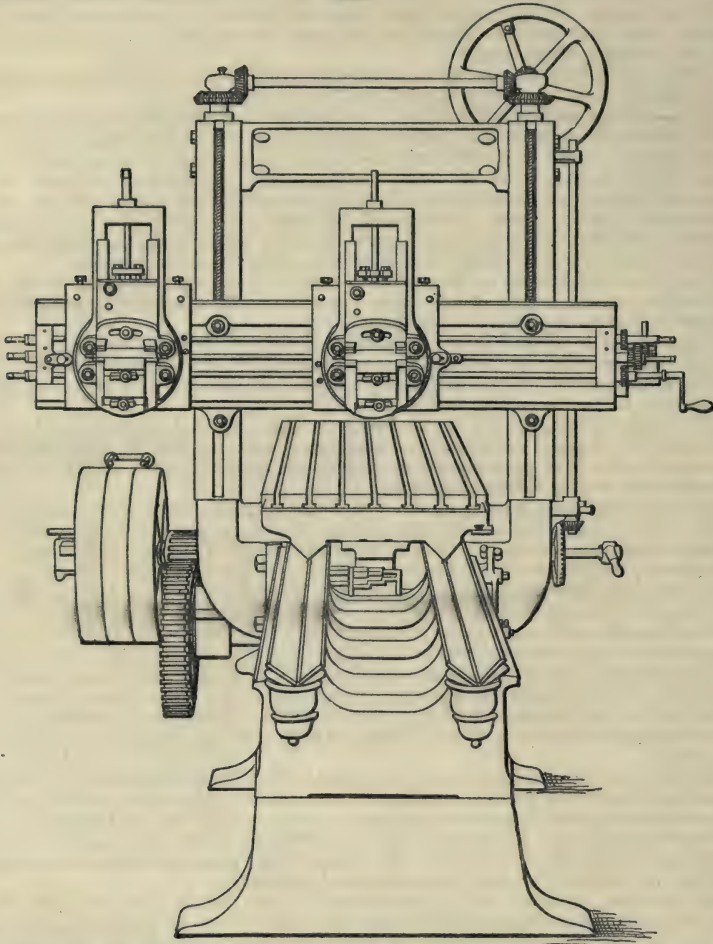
, 5233, and 5236 are of a planing machine, designed by Wm. Sellers, of Philadelphia, and made in England by Sharp, Stewart, and Co. Sellers has, in this machine, greatly simplified the construction of metal planing machines; he has provided a more thorough system of bracing for the bed between the uprights; imparted a smooth and uniform motion to the table upon which is placed the metal to be planed; placed the pulley-shaft so that its axis may be parallel with the line of motion of the table, thus enabling these machines to be placed parallel to lathes, and permitting a better arrangement of workshops; imparted a feed-motion to the cutting tool, by positive gearing and not by friction, thereby rendering its movement more certain; operated the feed-gearing from the driving gear of the machine and giving the cutting tool its feed either before it commences its cut or after it has finished the same, which cannot be done when the feed is operated from the table; and operated the belt-shifter in such a manner that the belt shall only be moved its own width, diminishing the wear upon it, and decreasing the width and weight of the driving pulleys.
